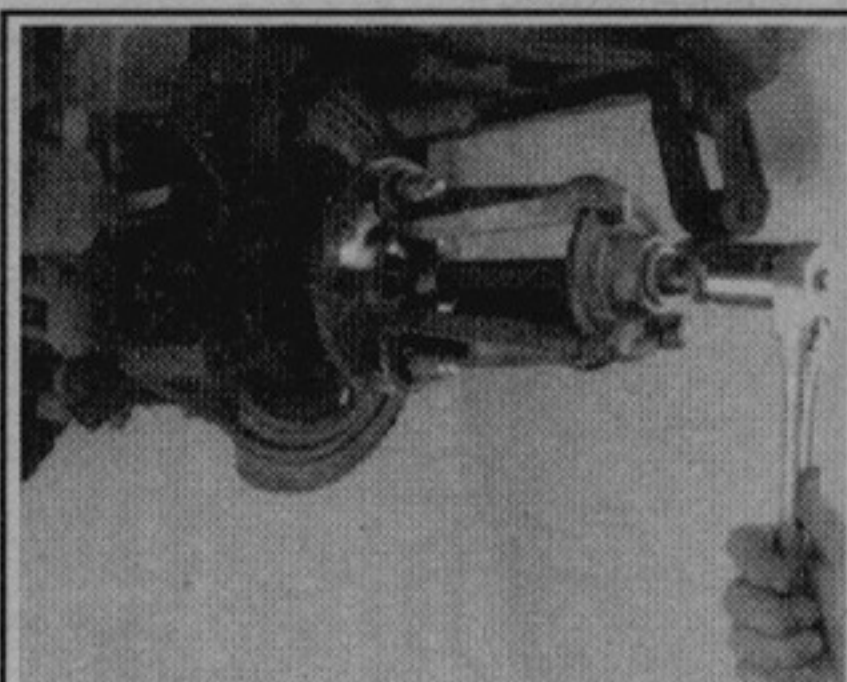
Removing the hub from the shaft using a puller—1991-95
